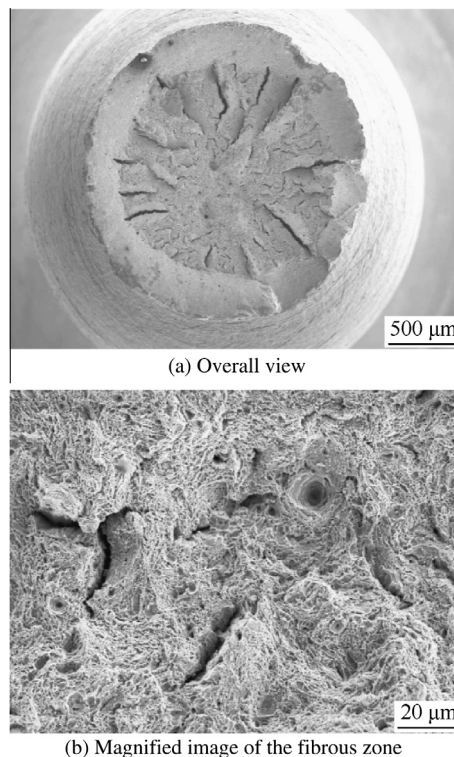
Fracture surface of a tensile specimen of the hybrid fabricated 1Cr12Ni2WMoVNb steel sample.
